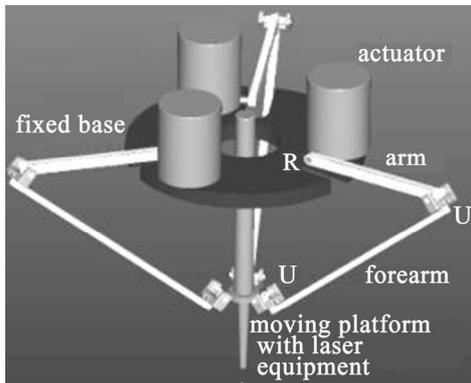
Three RUU kinematic chains usage in delta robot for laser cutting [13].
